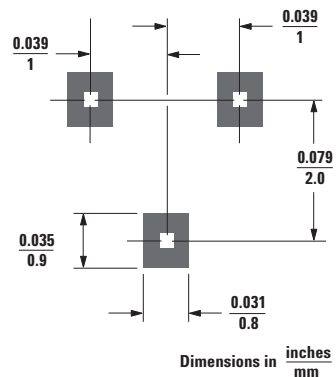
Recommended PCB Pad Layout for Avago's SOT-23 Products.
